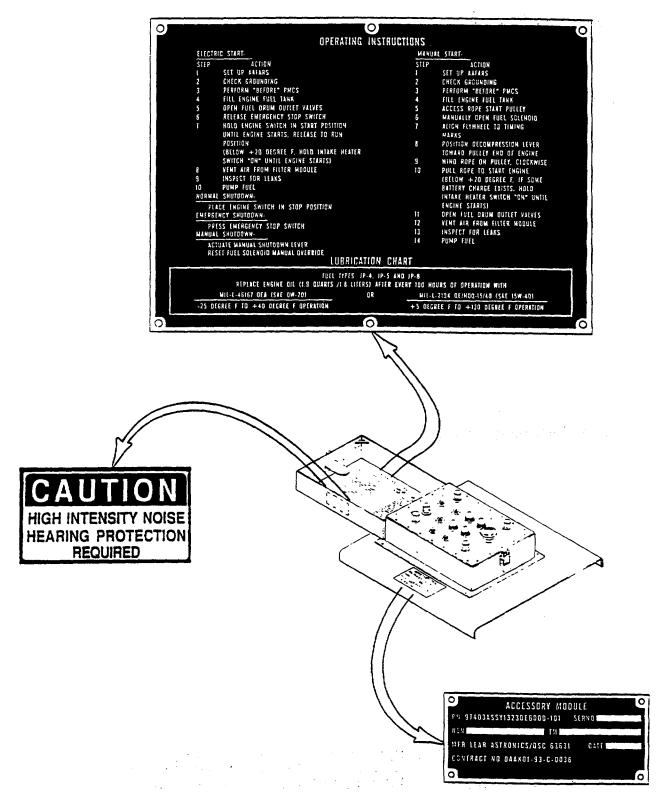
Instruction Plates - Accessory Module (Sheet 2 of 3)
